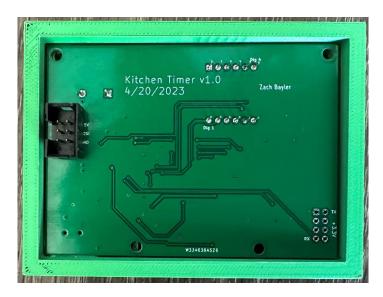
Back view of the assembled PCB board in its enclosure. Again, some of the measurements were off as seen by the bottom left mounting boss that doesn't align with the hole in the PCB.
